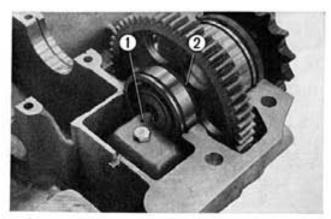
① Final shaft oil guide ② Final driven shaft
